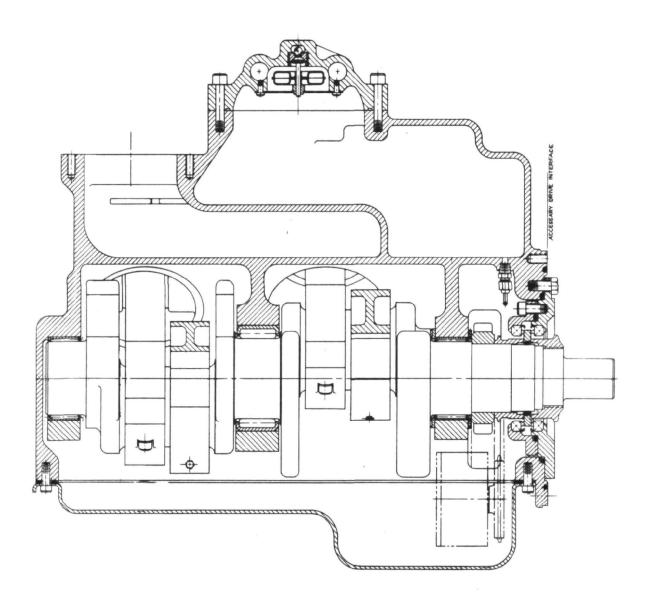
Expander Layout with American Bosch Hydraulic Valving - Horizontal Cross Section through Crankcase Along Crankshaft.
